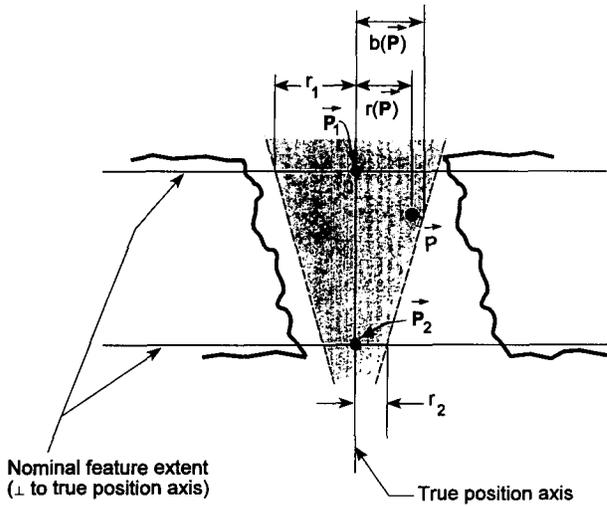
SURFACE INTERPRETATION OF CONICAL TOLERANCE ZONE FOR HOLES AT MMC OR RFS
